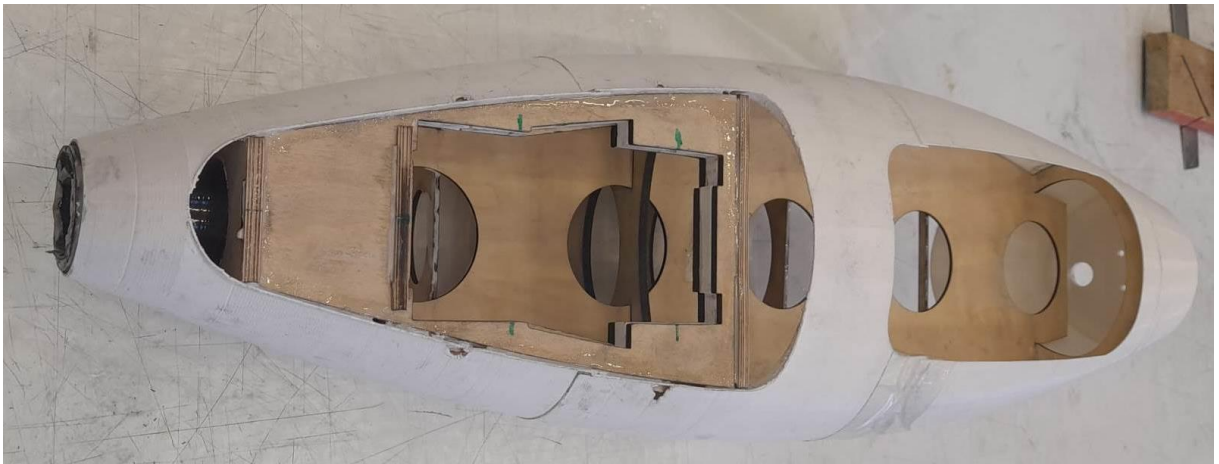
Fuselage with plywood assembly and the 3D printed cover.
